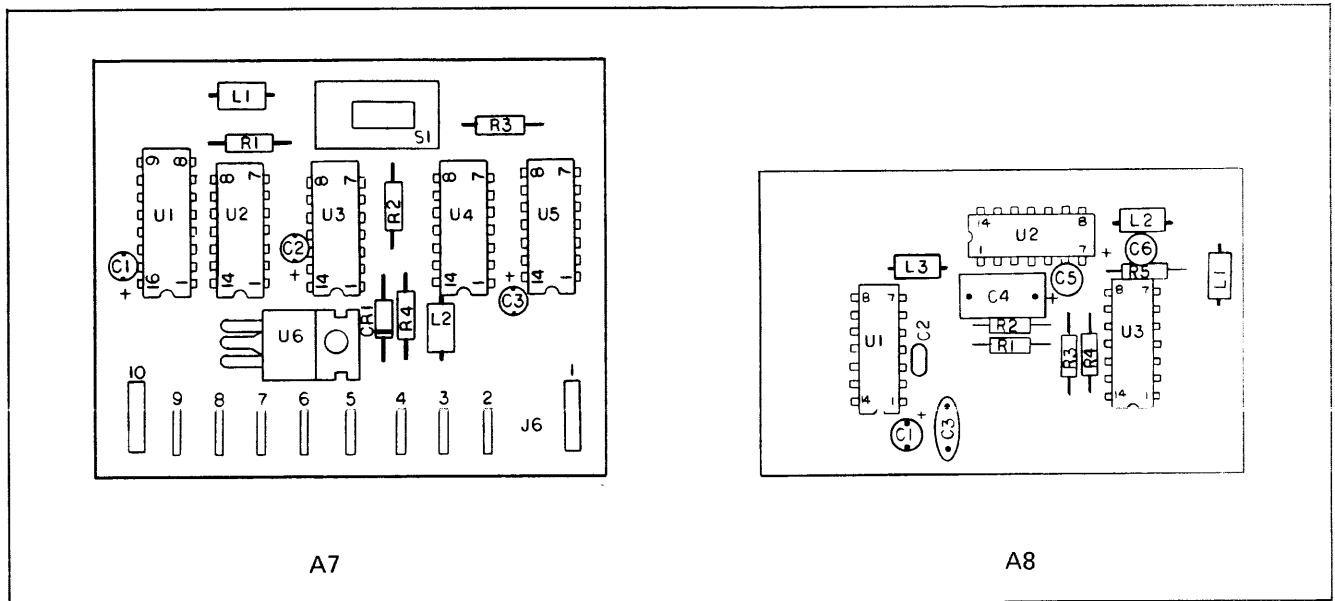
A7 and A8 Multiplier PCB Assembly
